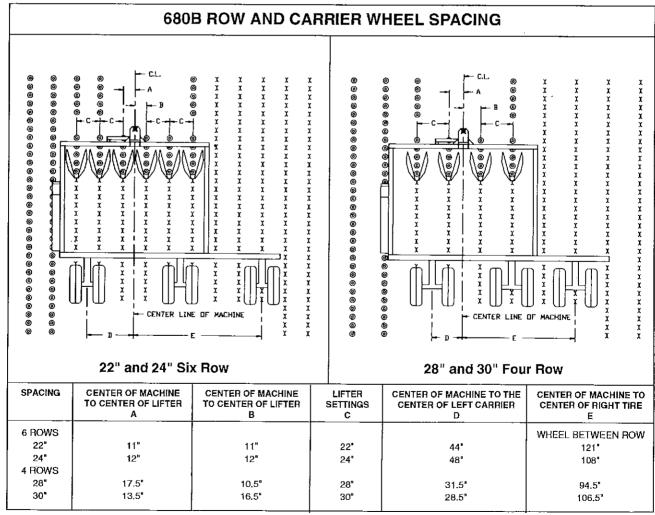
ROW AND CARRIER WHEEL SPACING
